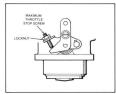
PSU INJECTION PUMP STOP SCREW
